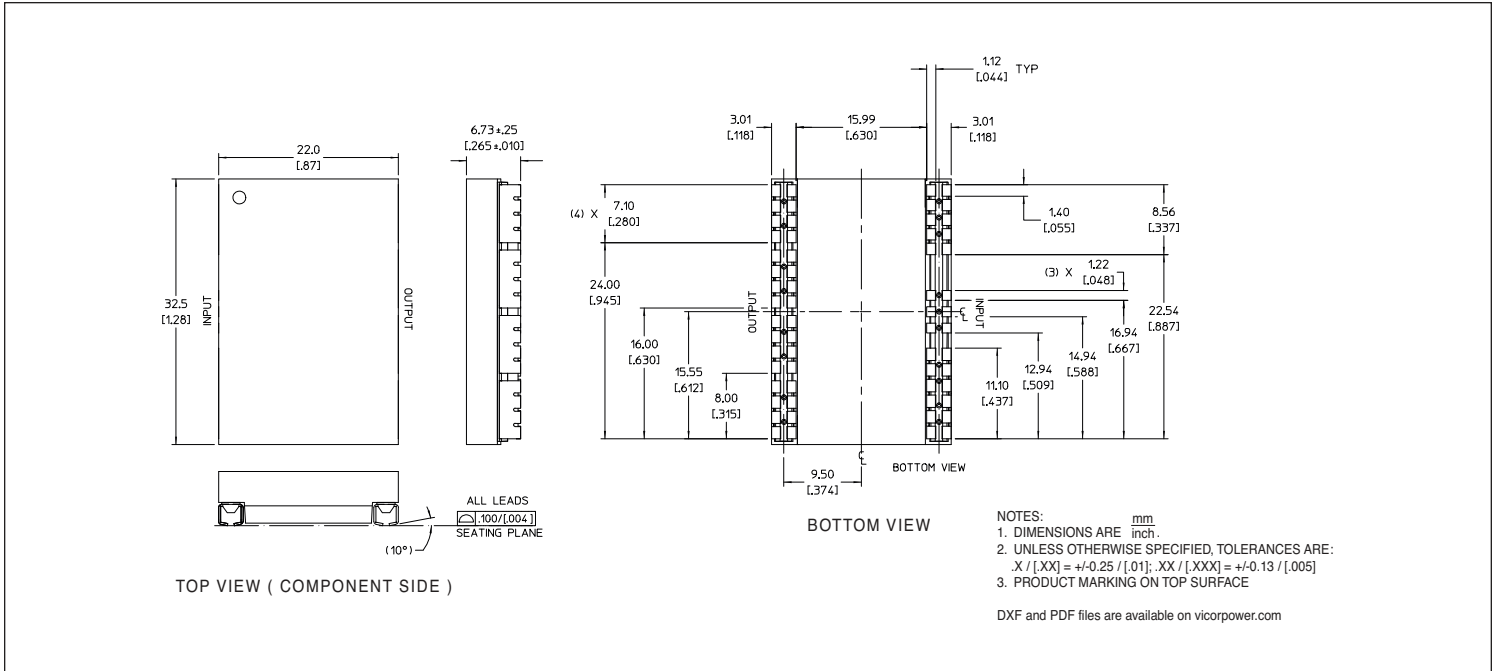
BCM® module J-Lead mechanical outline; onboard mounting
